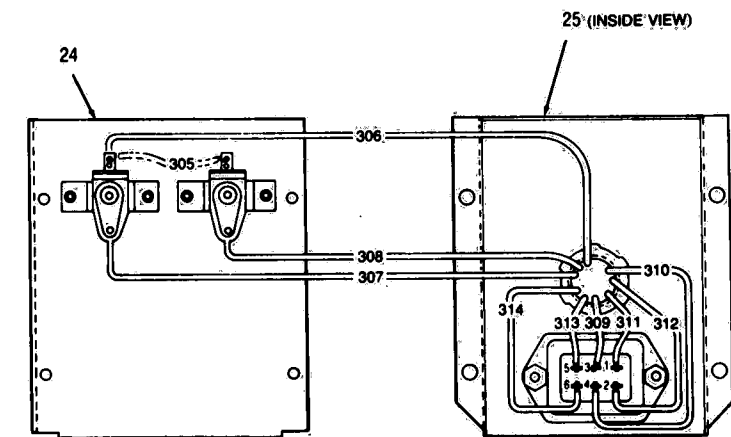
DOUBLE DOOR REAR CONTROL ASSEMBLY — SHEET 1 OF 2.
